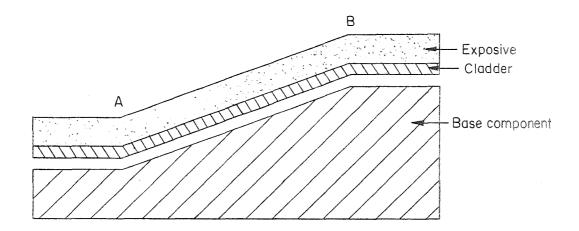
EXPERIMENTAL ASSEMBLY FOR ANGLED-PLATE WELDING
